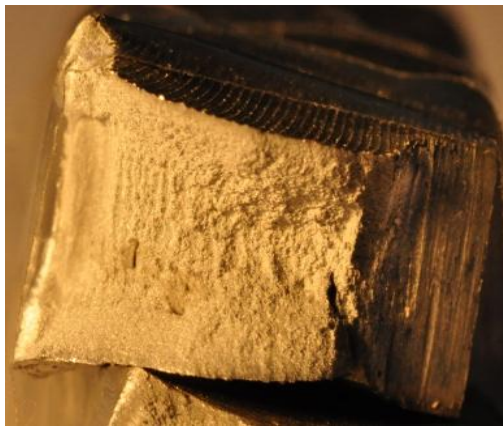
₁. Macrophoto. fracture (700rpm,150mm/min)
